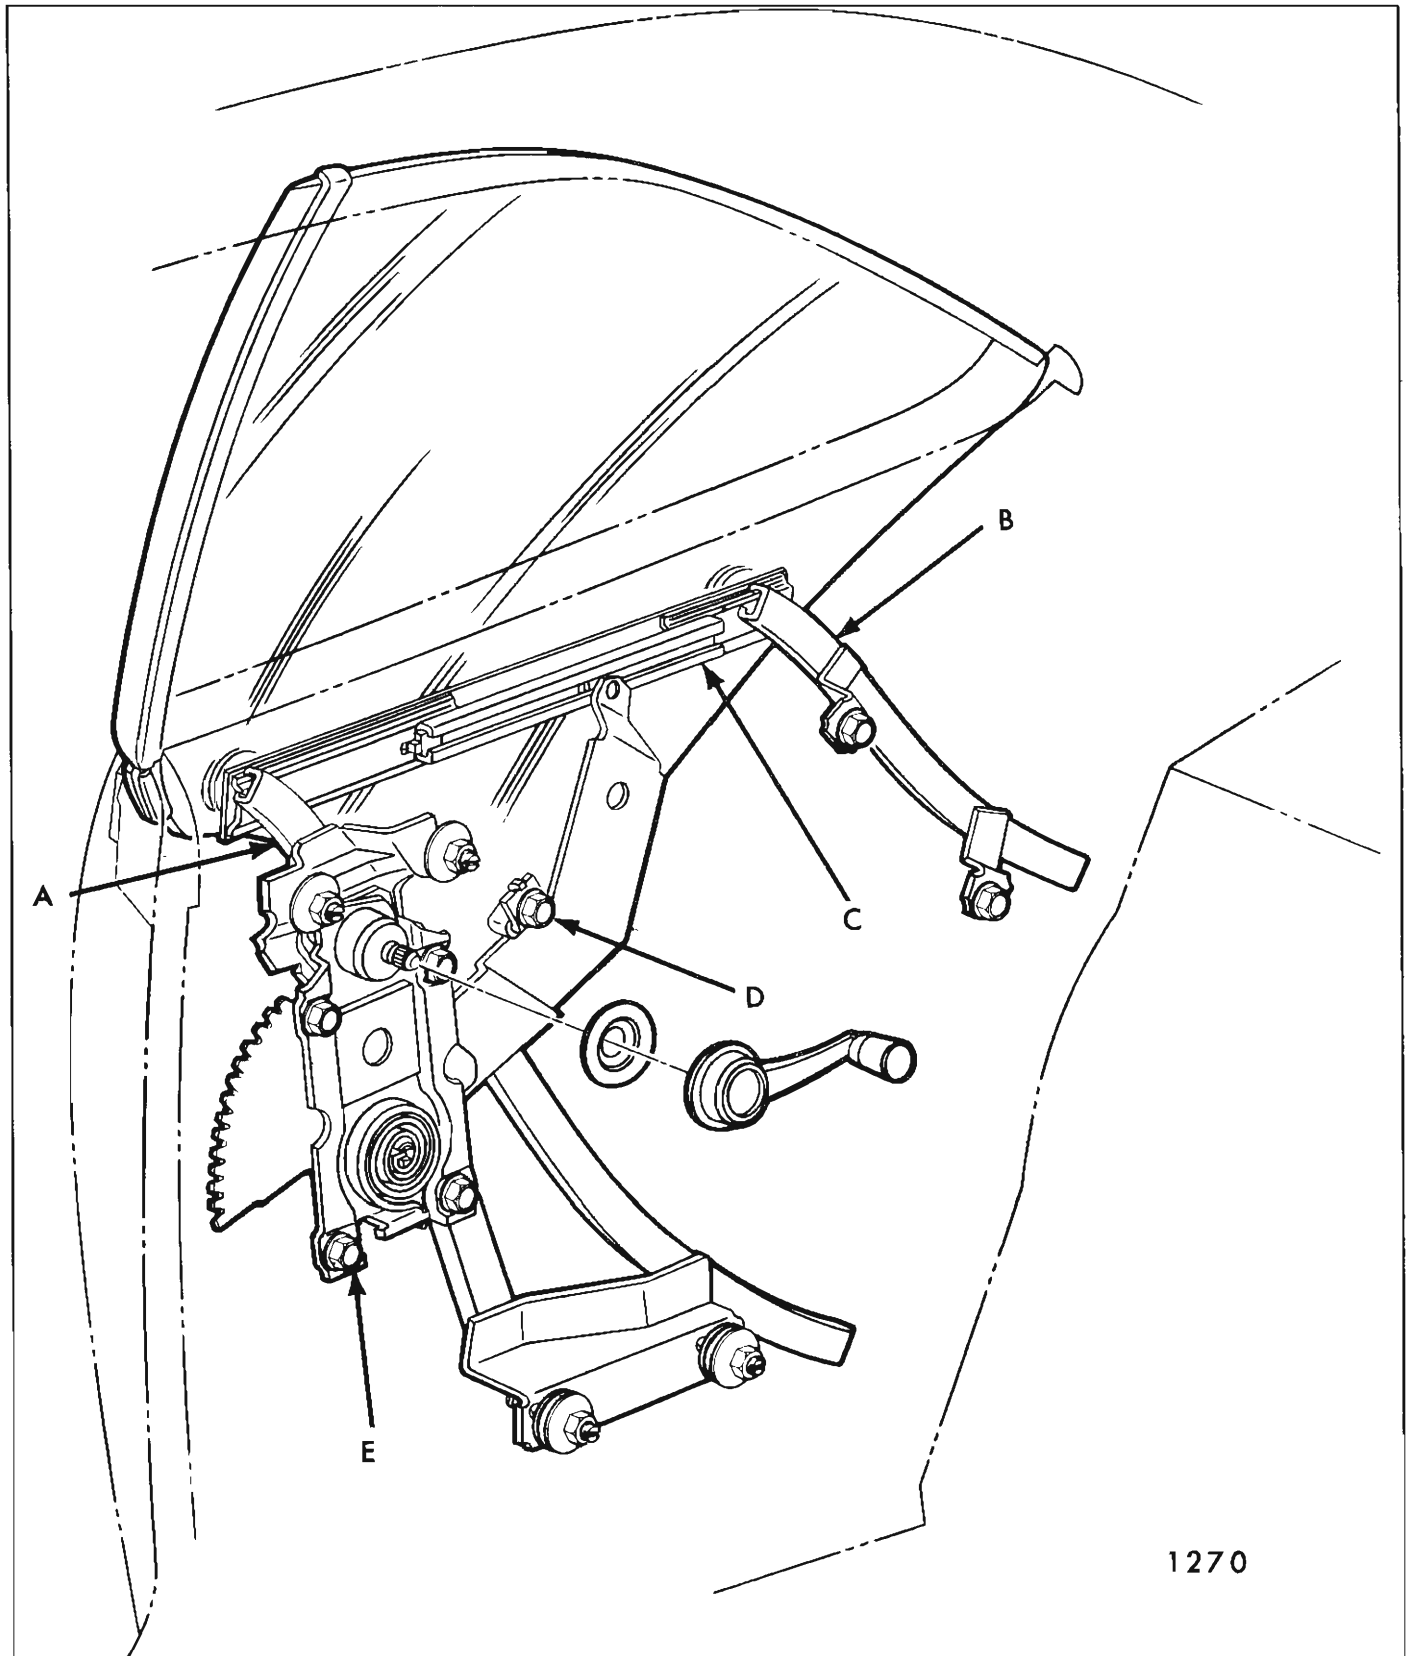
E7—"37" Style Rear Quarter Window Assembly
